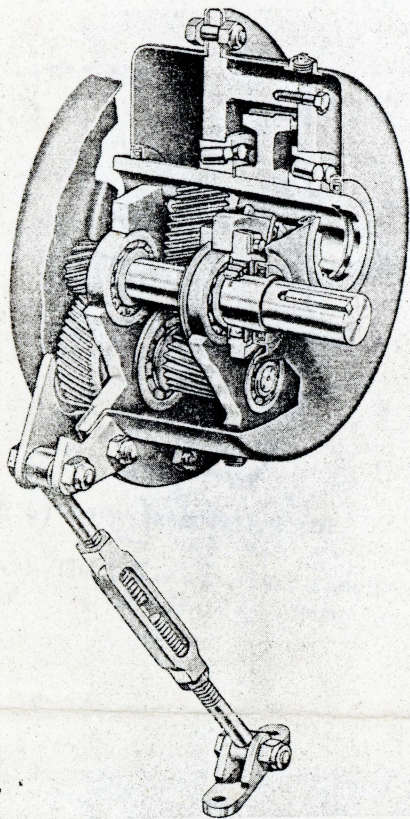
Cut-away view shows clearly details of design and construction of Falk shaft-mounted drive.
